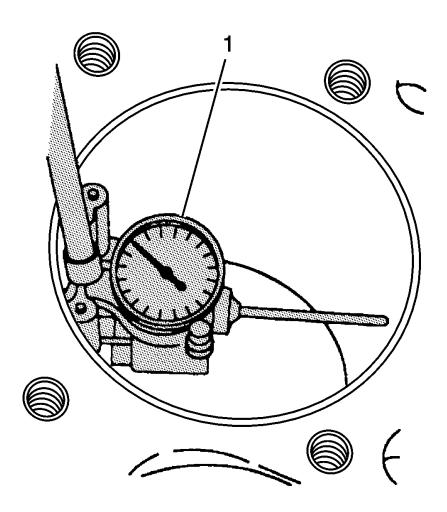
Measuring Cylinder Bore Courtesy of GENERAL MOTORS COMPANY
